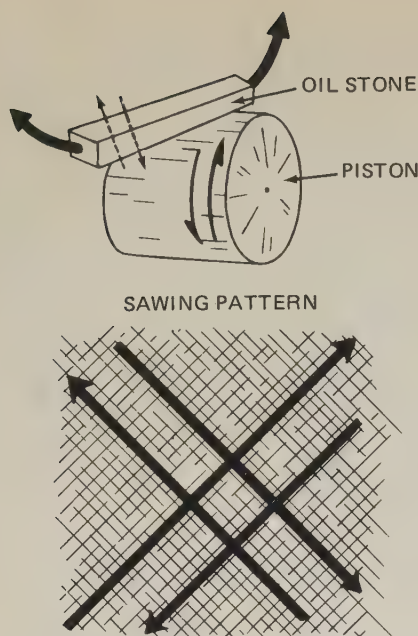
Using an oil stone to clean up a scuffed piston. (Yamaha Motor Company, Ltd.)
